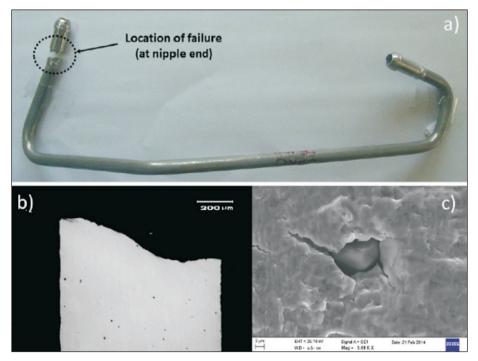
(a) Failure of a weld joint at the nipple end where it is welded to a tube containing large number of sharp cornered inclusions (b) and an inclusion with an incoherent interface leading to the formation of microcracks [3].
